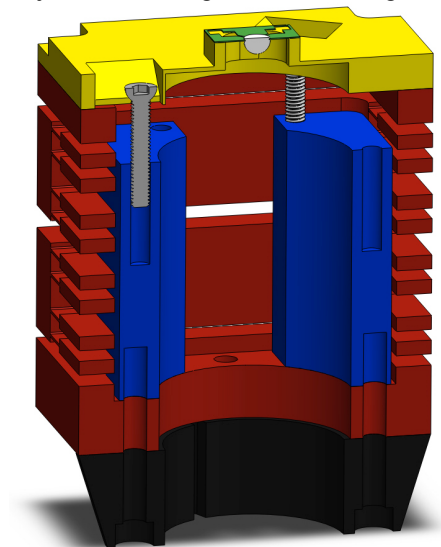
The assembled objective assembly is shown cut along the X,Z plane with the backing objective removed for clarity. The major components are: The aSIL lens is shown in white, top center. The SIL holder is in green, and the end cap is in yellow. The flexure-based body is shown in red. Preload components include both the blocks (blue) and the modified screws shown in grey. The objective collar is shown in black at the bottom of the figure.
